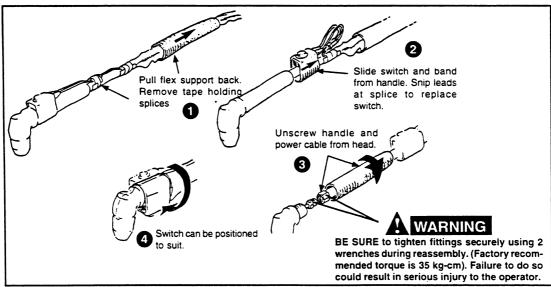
Power Cable and Switch Disassembly Sequence
